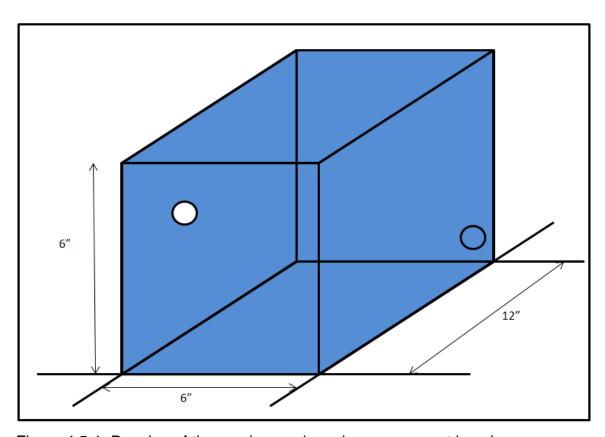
Drawing of the receiver and receiver component housing.
